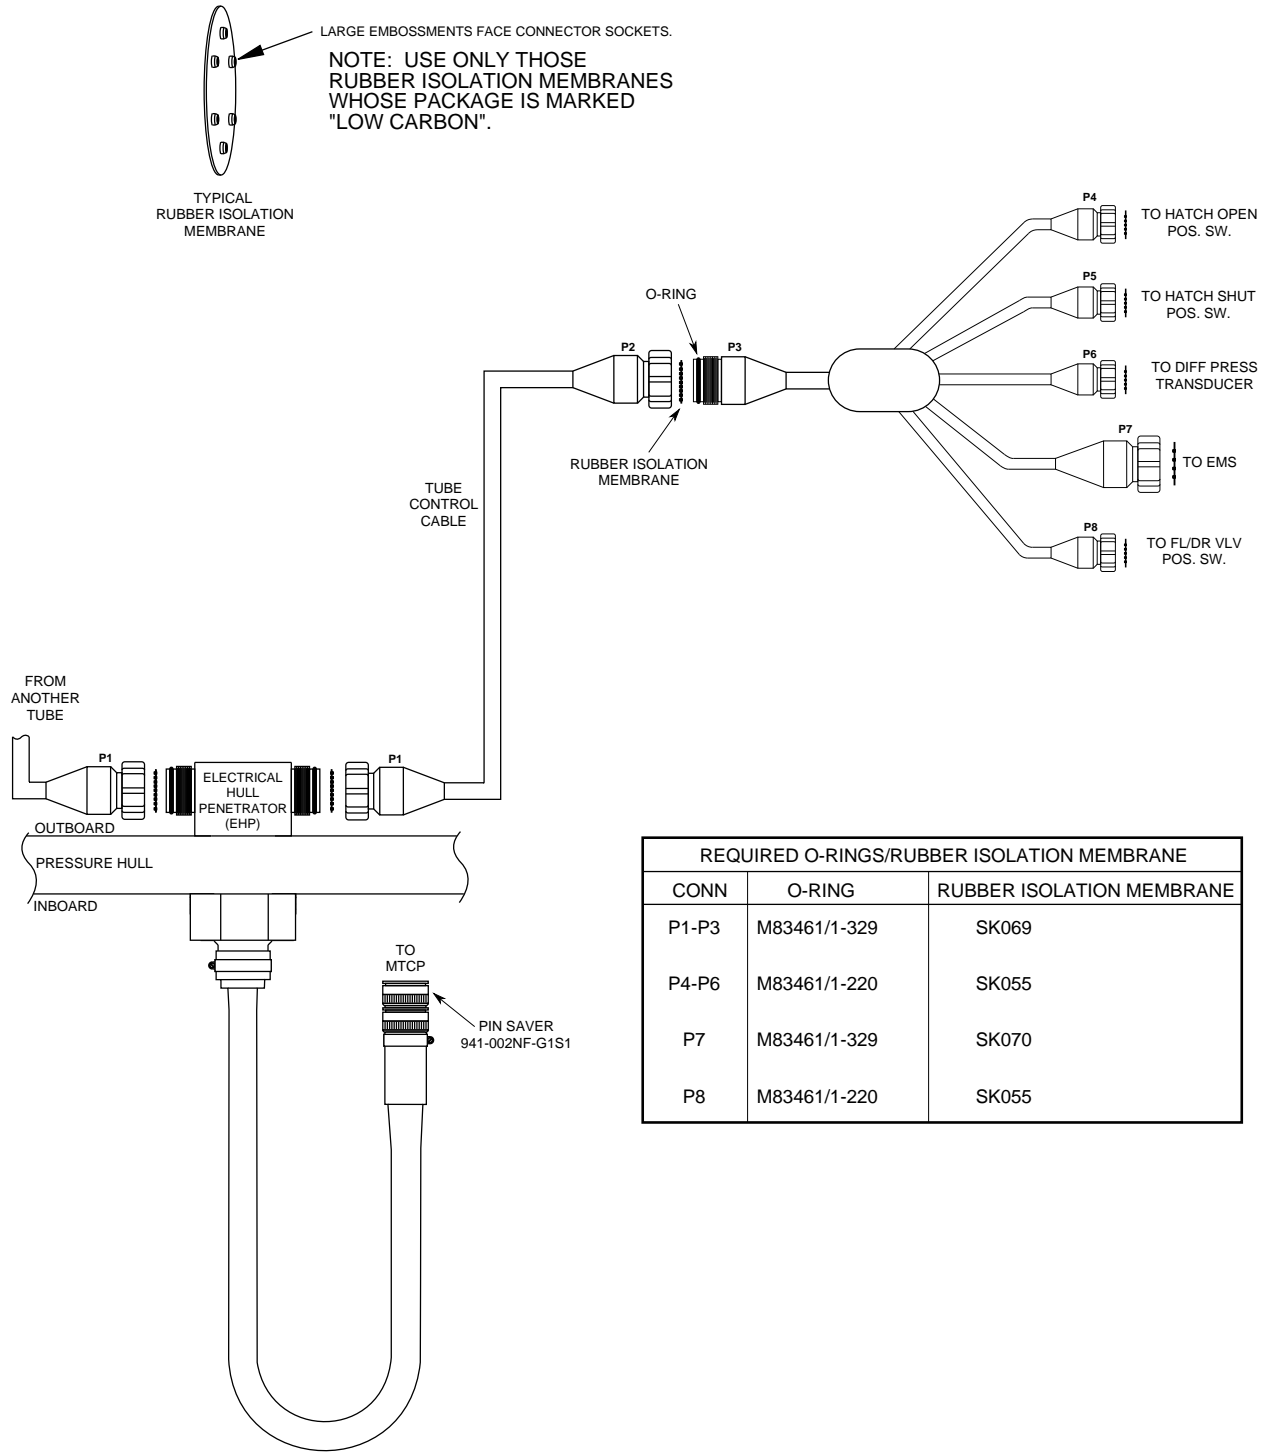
Missile Tube Control Cabling (SSN 719 and 720) (Typical)
